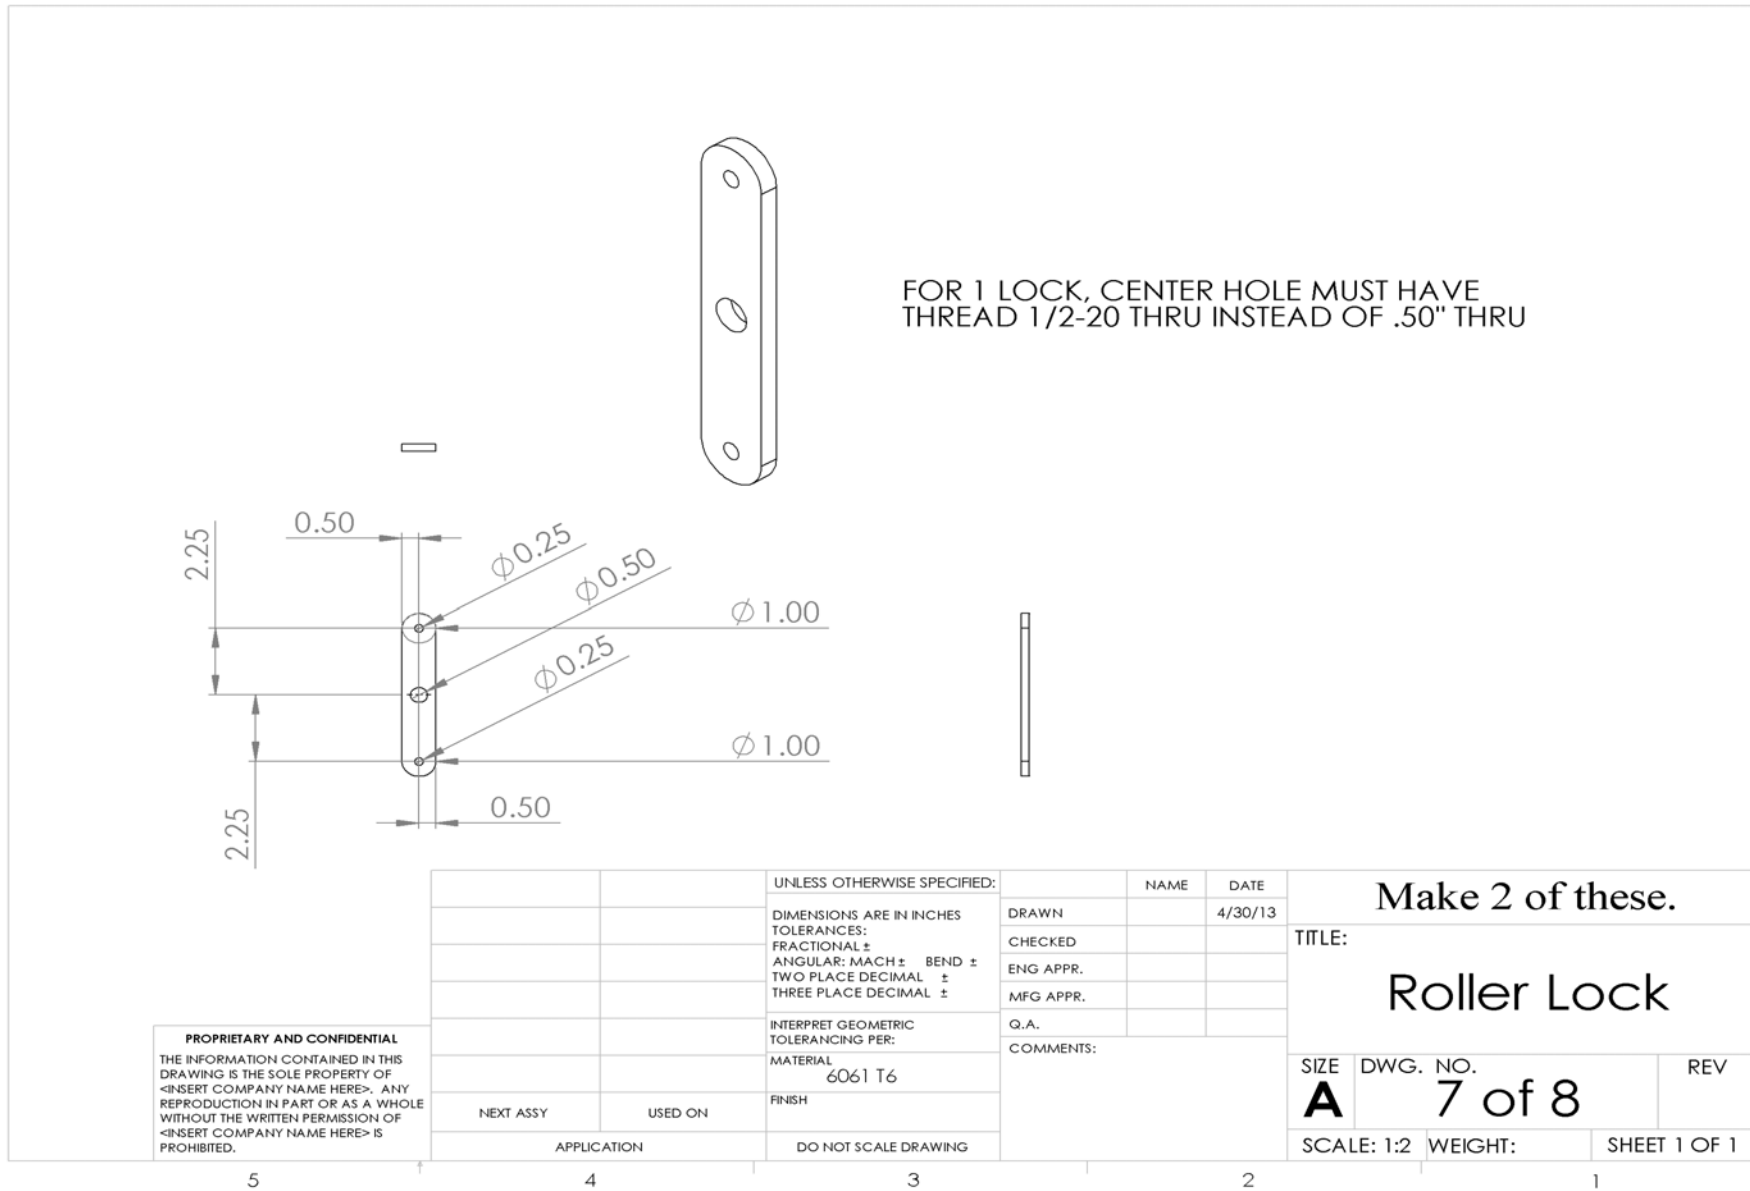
Roller Lock*. Two of this part will be made, one which will be threaded in the middle hole in the clockwise direction in order to attach to the input shaft and get tighter while rotating instead of getting loser. It will connect to the roller shafts and keep them in place by using nuts.
